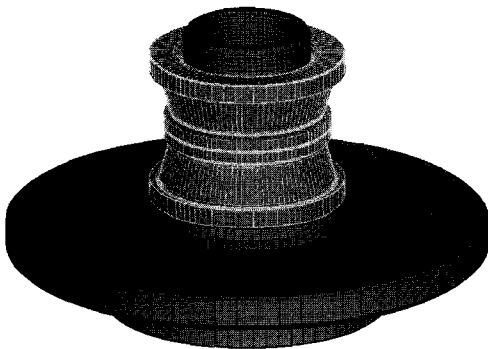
Schematic diagram of the orbital forming process in bearing assembly
